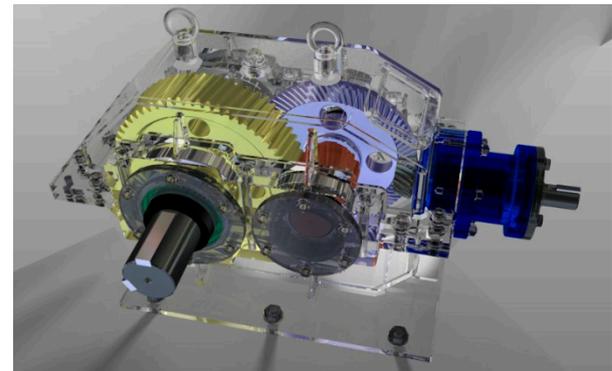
Combined power transmission - helical gear pair and bevel gear pair
